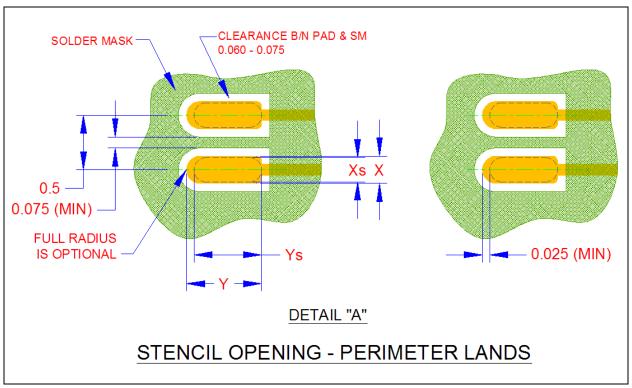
Package Detail A - Stencil Opening and Perimeter Lands
